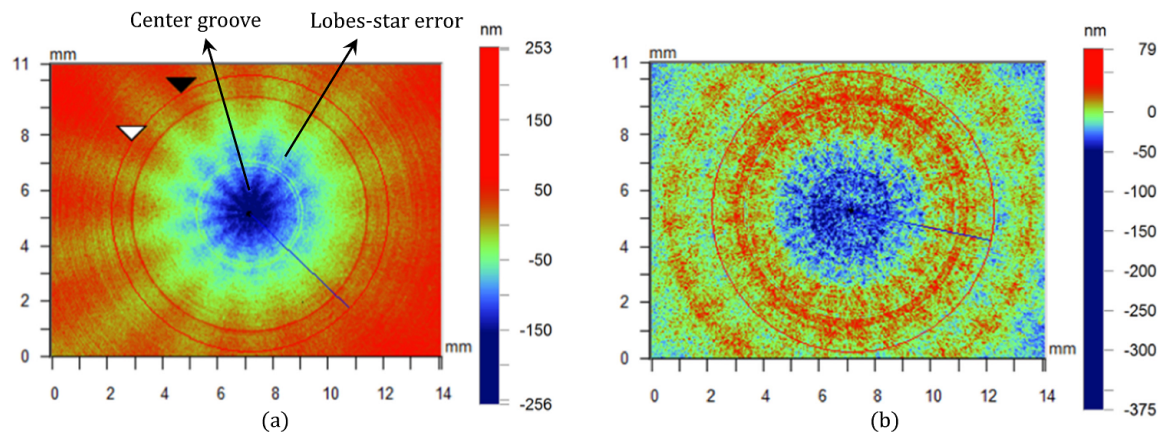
Machined surface generated by (a) unbalanced, and (b) balanced air bearing spindle [9]
